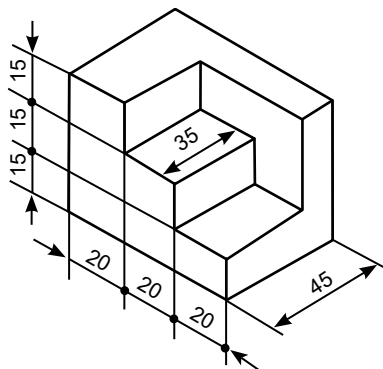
(c): Drawing Line Parallel to Isometric Axes
